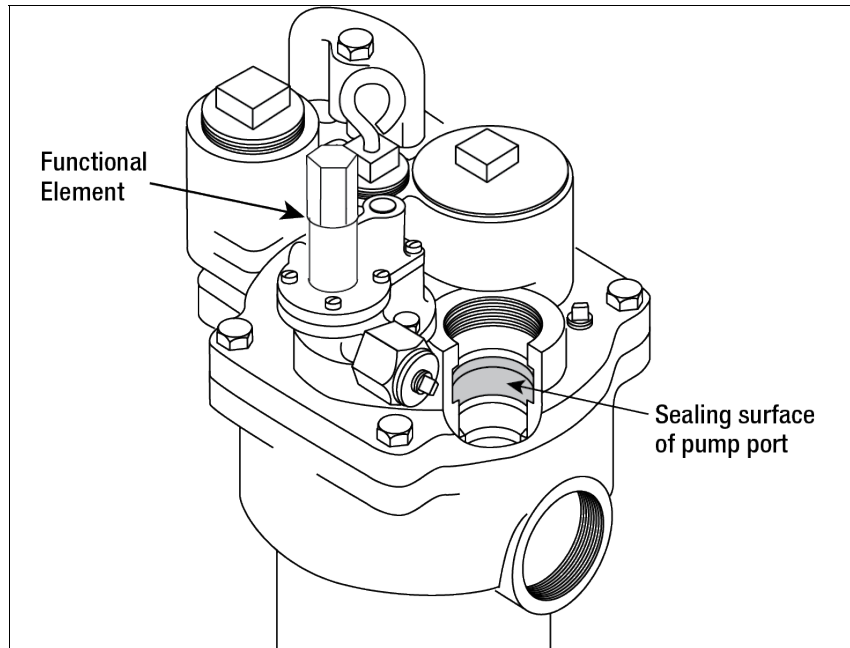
Sealing Surface For SwiftCheck Valve's External O-Ring
